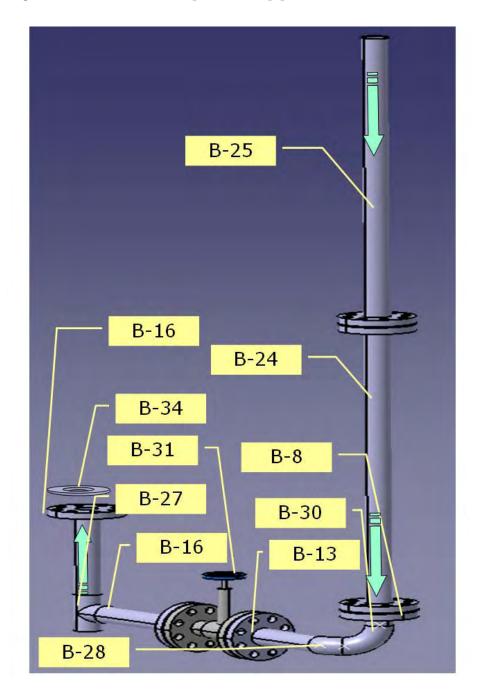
3D View of component #24 pipe with tee, elbow and valve
